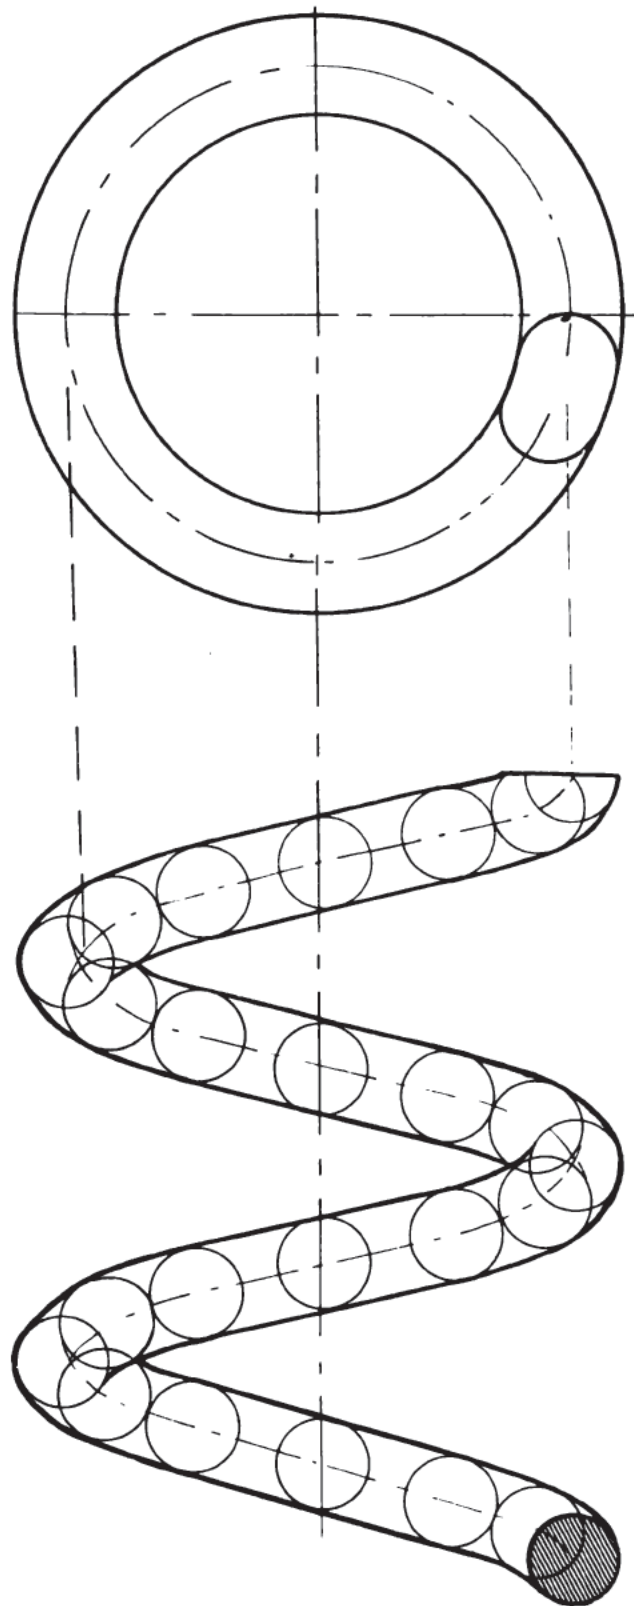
Method of drawing a helical spring in orthographic projection.
